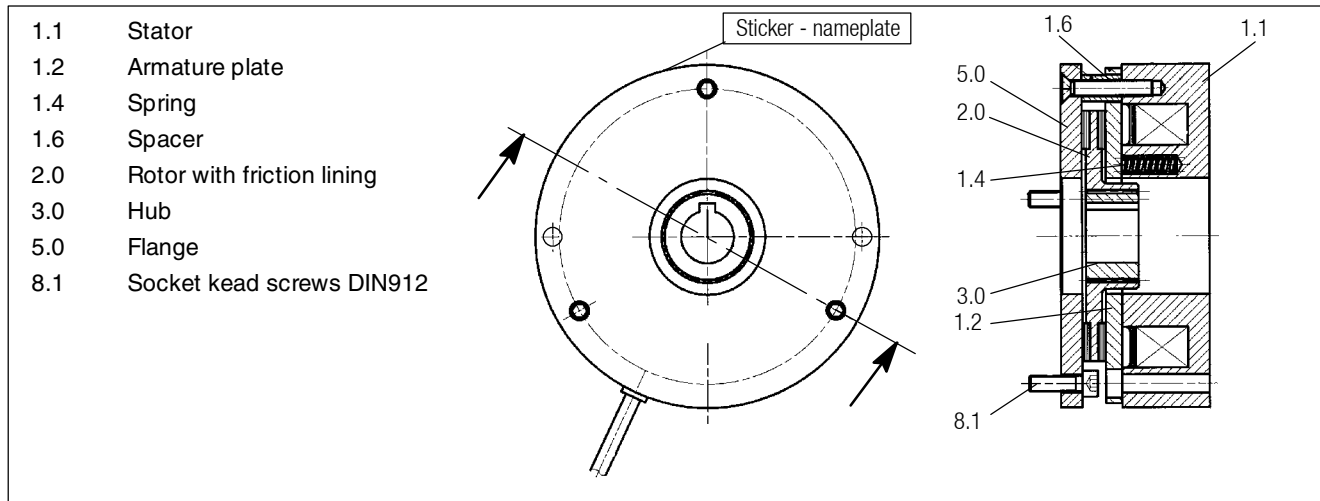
Spring-applied brake: D57 Compact, completely mounted with rotor and flange
